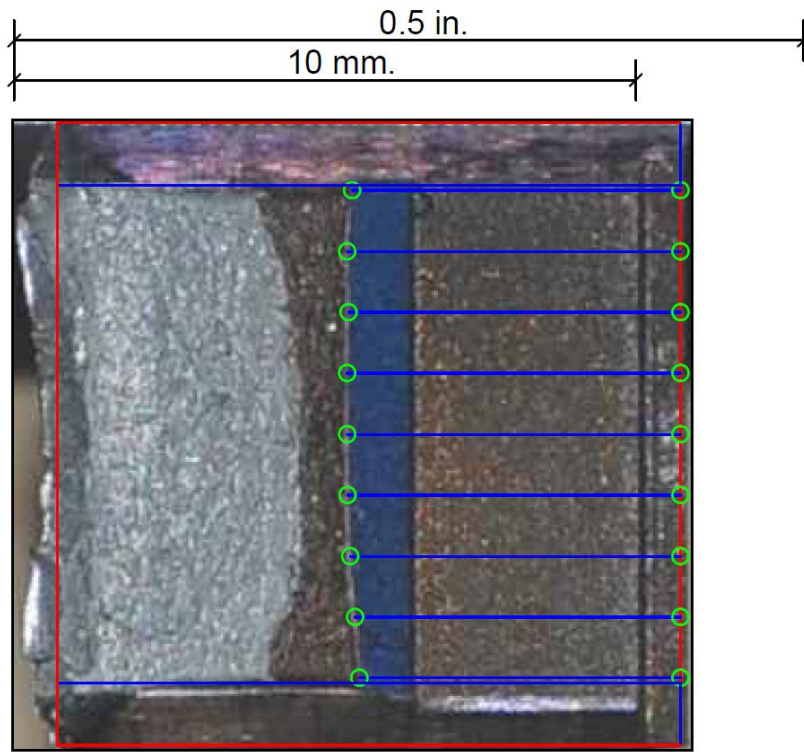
Specimen F15' Fracture Surface
